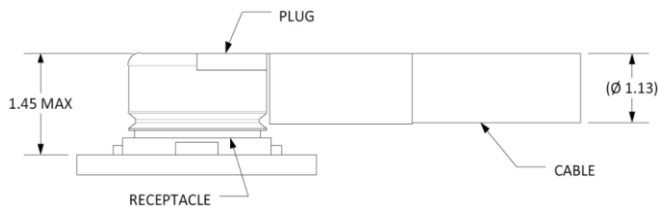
Connection between RF Connector and Mating Plug Using $\varnothing 1.13$ mm Coaxial Cable
